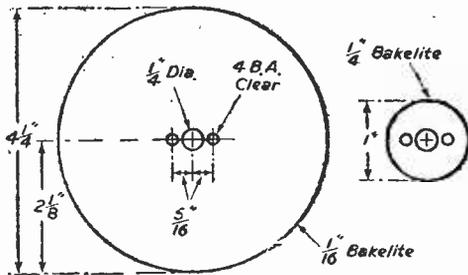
Details of the discs for the bobbin showing drilling dimensions.
